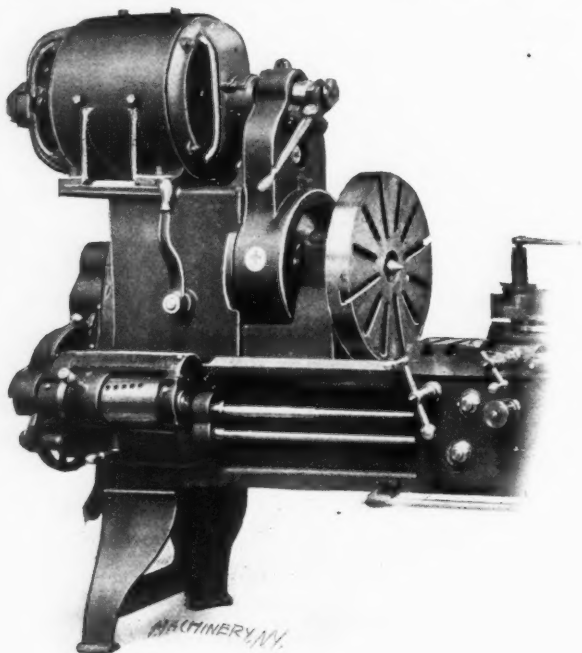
Variable Speed Motor with Double Back Geared 20-inch Lathe.
